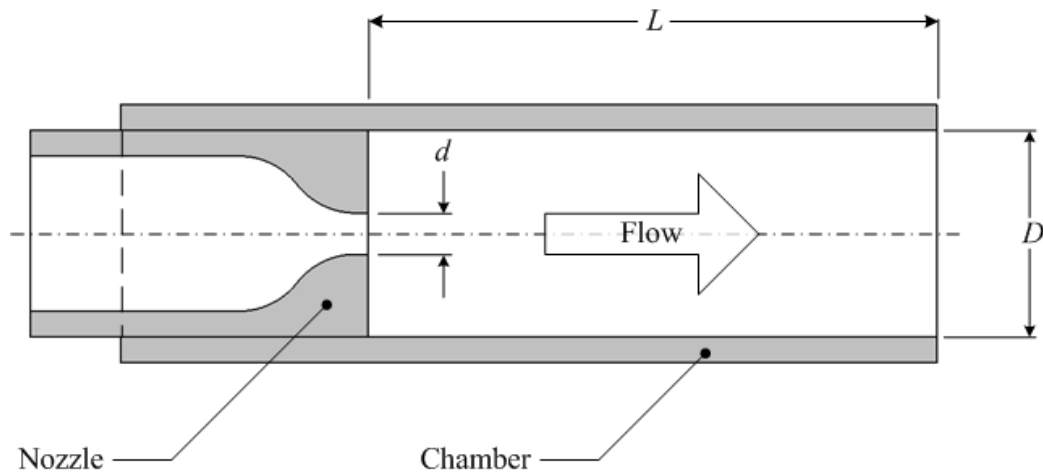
Sectioned view of the fluidic precessing jet assembly, showing the nozzle and chamber.
